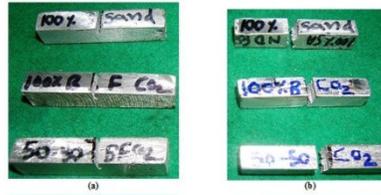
Charpy impact specimens: (a) before testing (b) after testing
